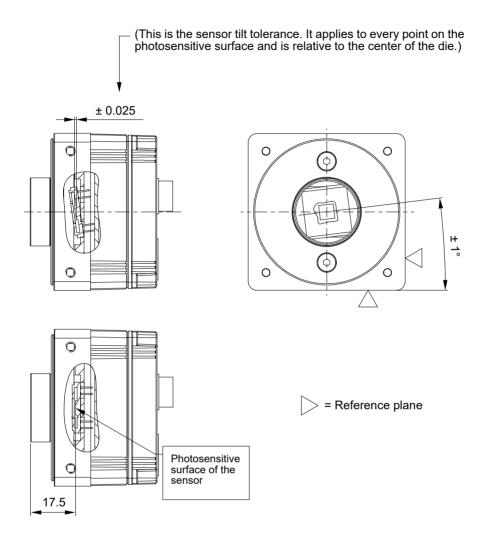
Sensor Positioning Accuracy (in mm unless otherwise noted)
